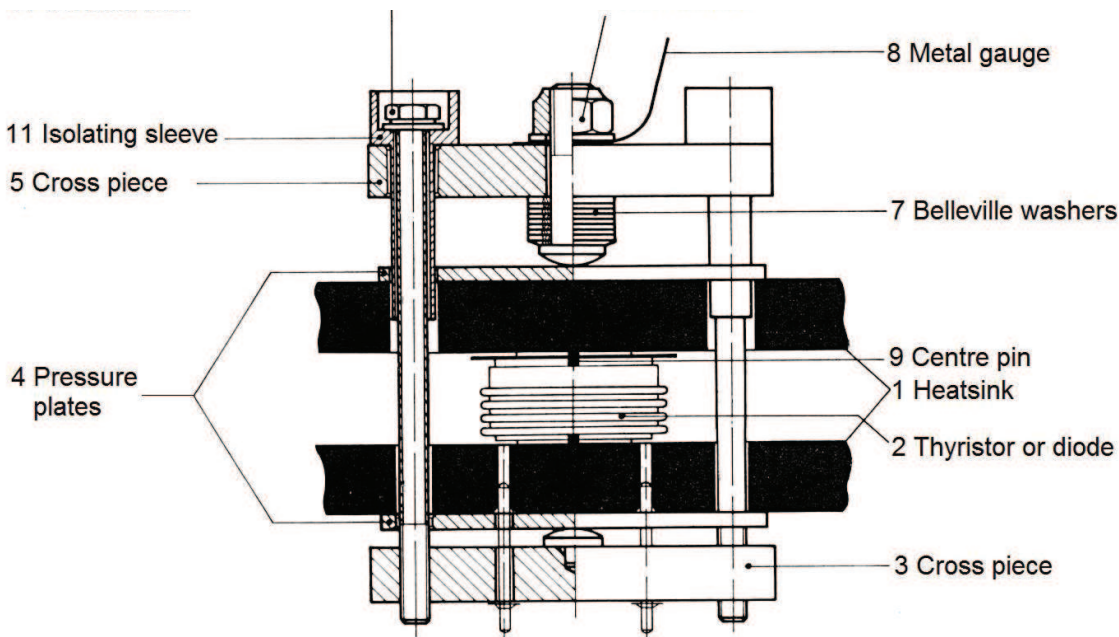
Capsule thyristor / diode mounted with "MC" clamping fixture
